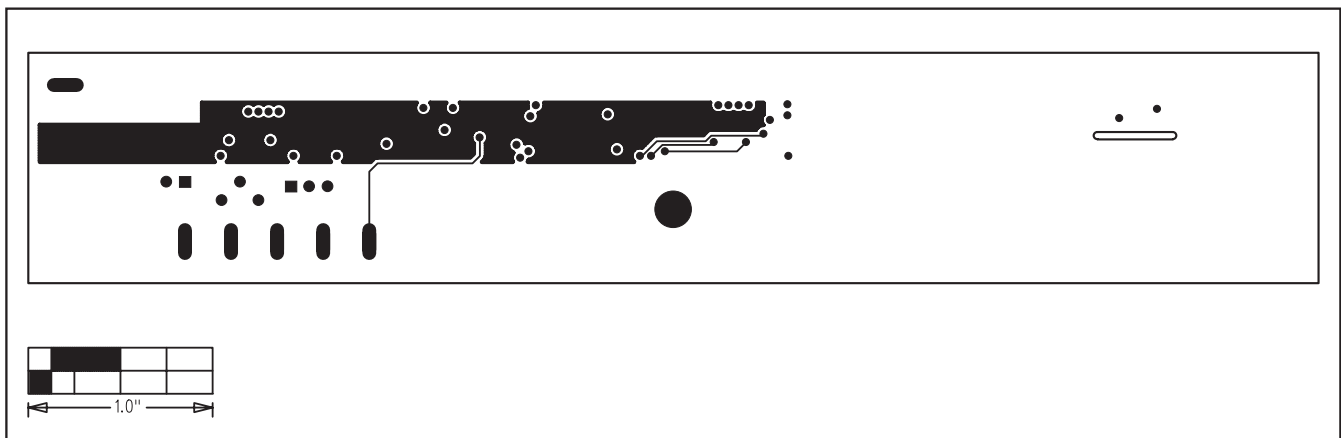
MAX8722 EV Kit PC Board Layout—Solder Side
